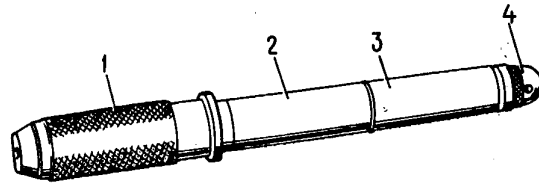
Tool 02.7853.9500 for Press-Fitting Piston Pin into Piston and Connecting Rod End: 1 - tool shaft; 2 - piston pin; 3 - guide; 4 - thrust screw
